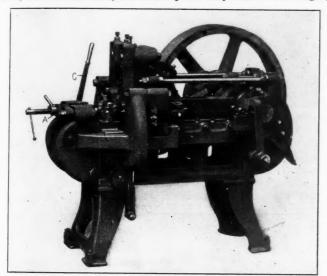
Type of Hammer Header made by the National Machinery Co., Tiffin, Ohio
